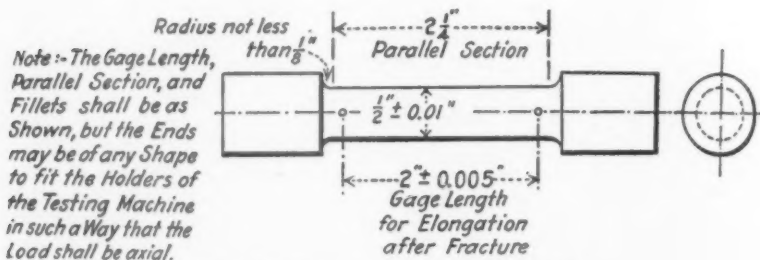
DIMENSIONS OF MACHINED SPECIMENS
